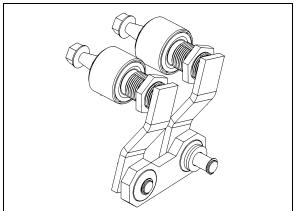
DRIVING MECHANISM (DRIVER SIDE) 23334
